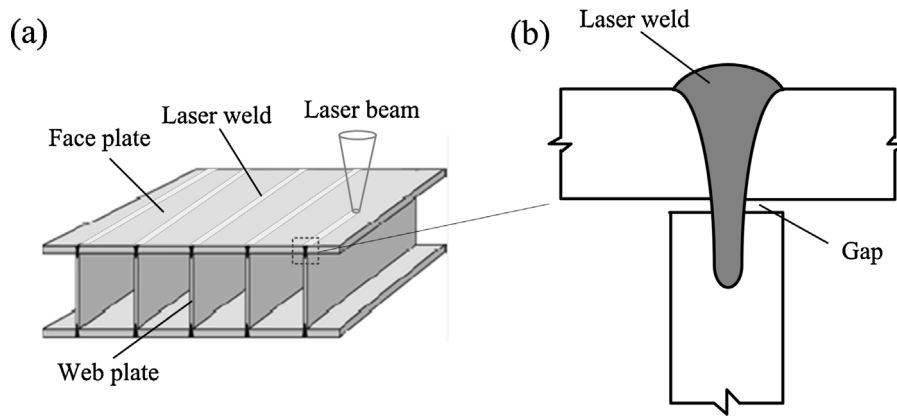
(a) Laser-welded all-metal sandwich panel and (b) laser welded overlap T-joint.
